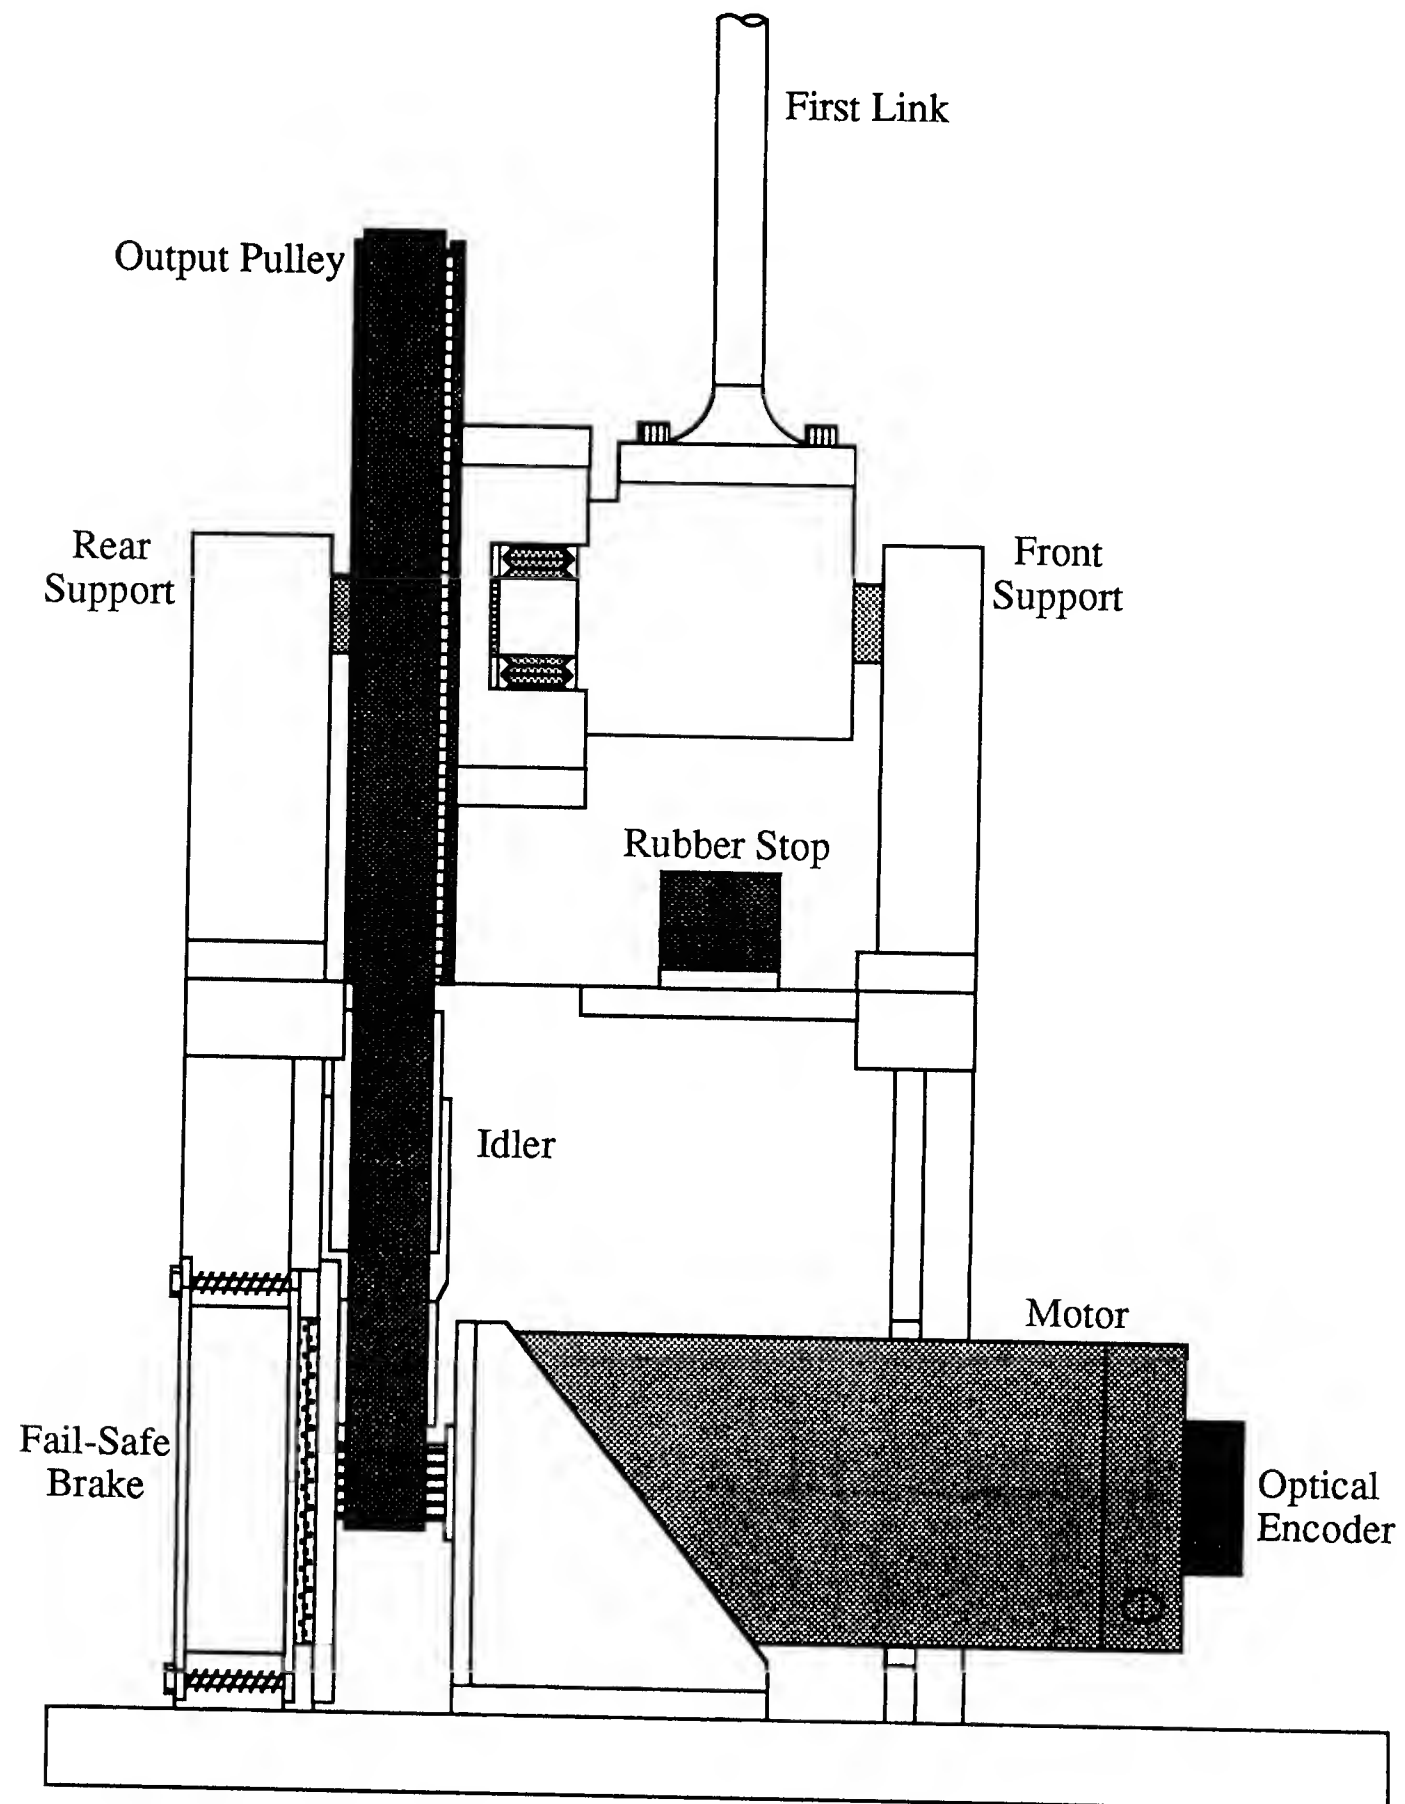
Side view of the first axis. Part of the housing has been removed so you can see the motor and brake.
